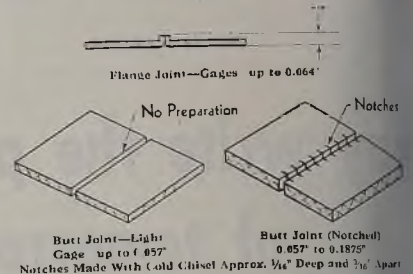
(Above)—Preparation of butt joints for torch welds—thin gage material
